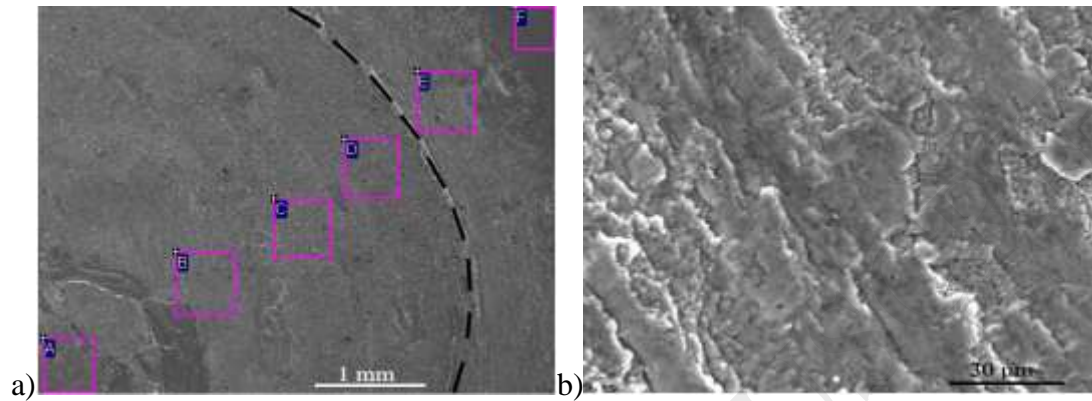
(a) Overall fracture surface of Al/zinc coated steel weld, (b) magnified view of region E in (a).
